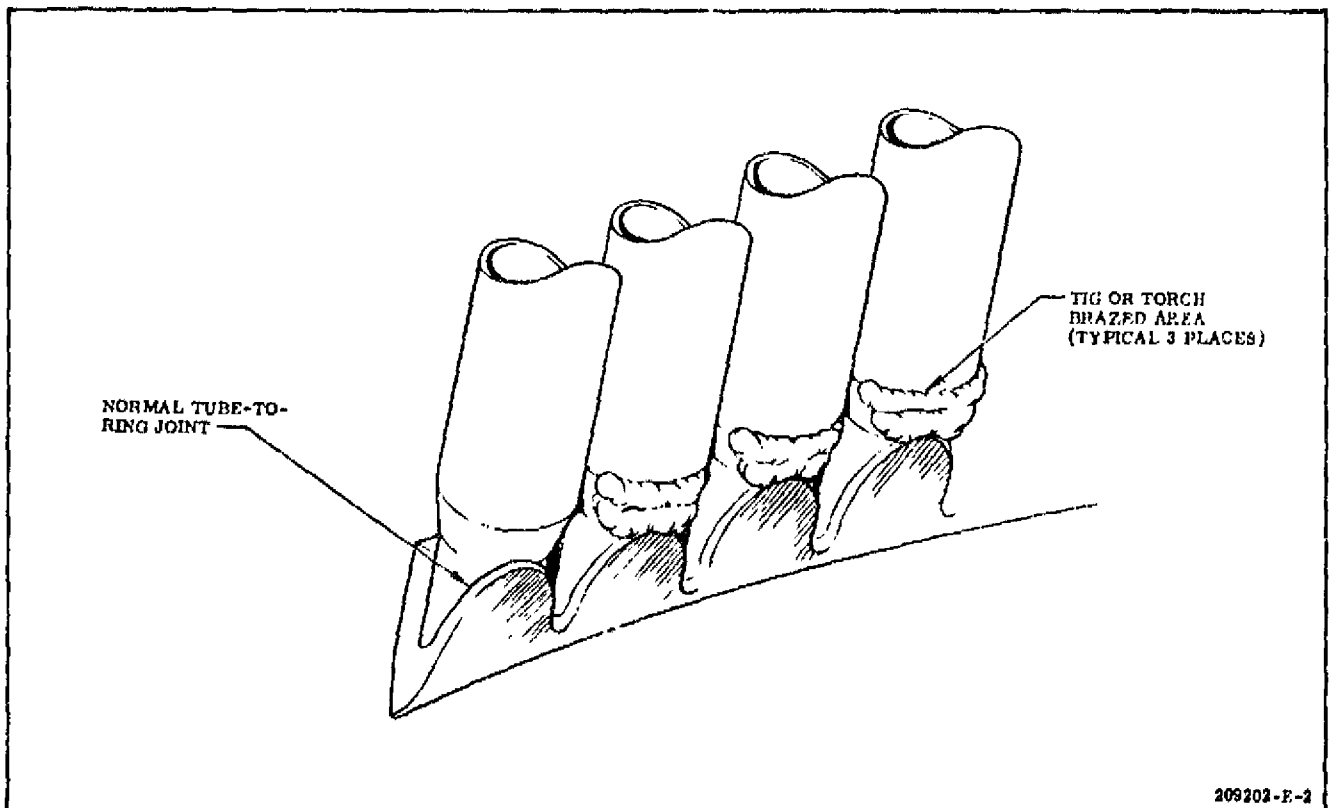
Tube-To-Exit End Ring Braze Fillet
